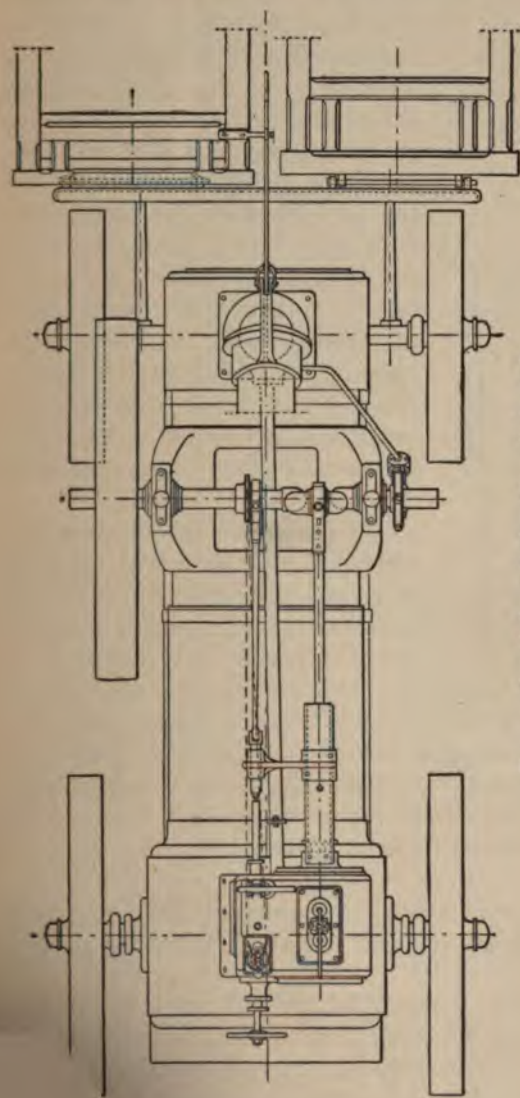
Portable Steam Engine: Plan. Scale 1/32nd.
